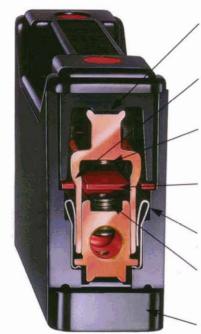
Cut-away view of 63 Amp front connected contact assembly.
